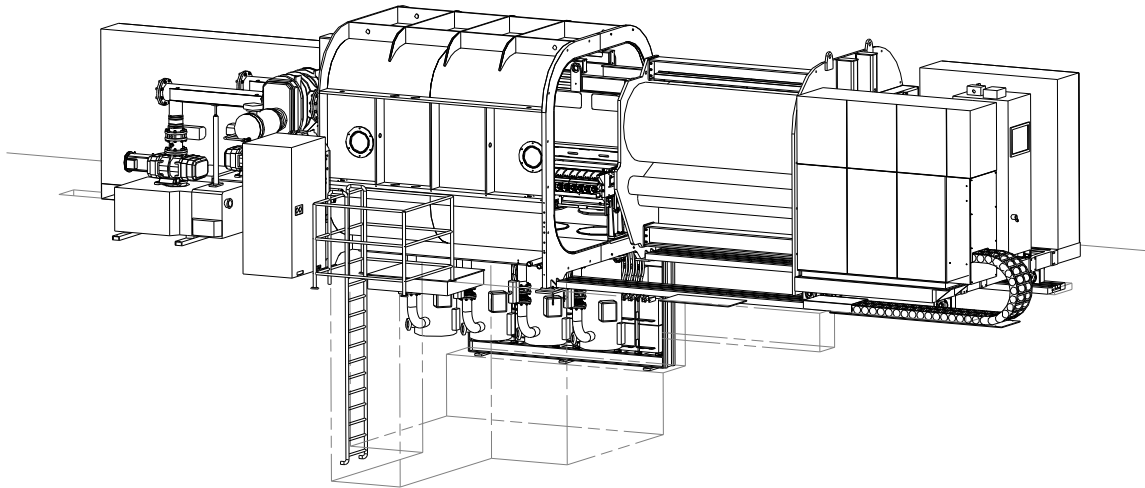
1 Dimensional View of Vacuum Chamber
